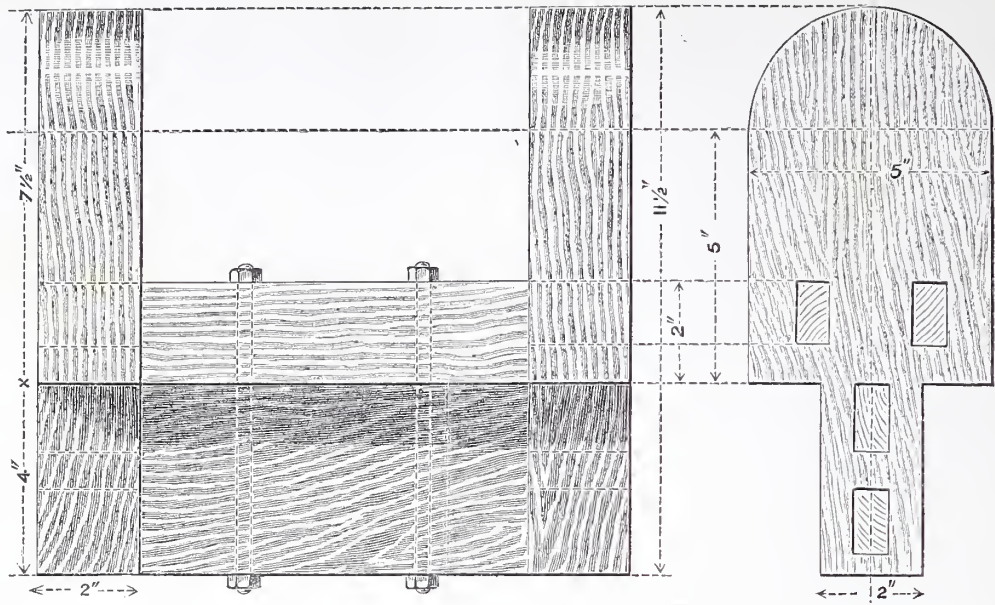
Fixed Headstock: Side View. Fig. 2.—Ditto: End View (two like this). Scale, 3 in. to 1 foot.
